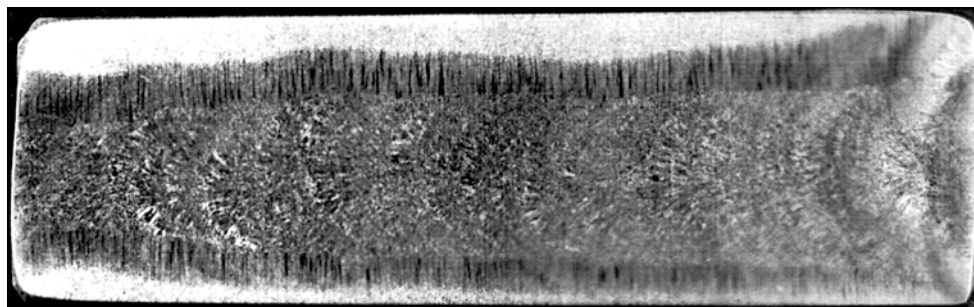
Macrostructure of weld metal of welded joint of steel 10GN2MFA produced by narrow-gap AAW in mixture of He + 30 % Ar using welding wire Sv-08G1NMA (x1.7)
